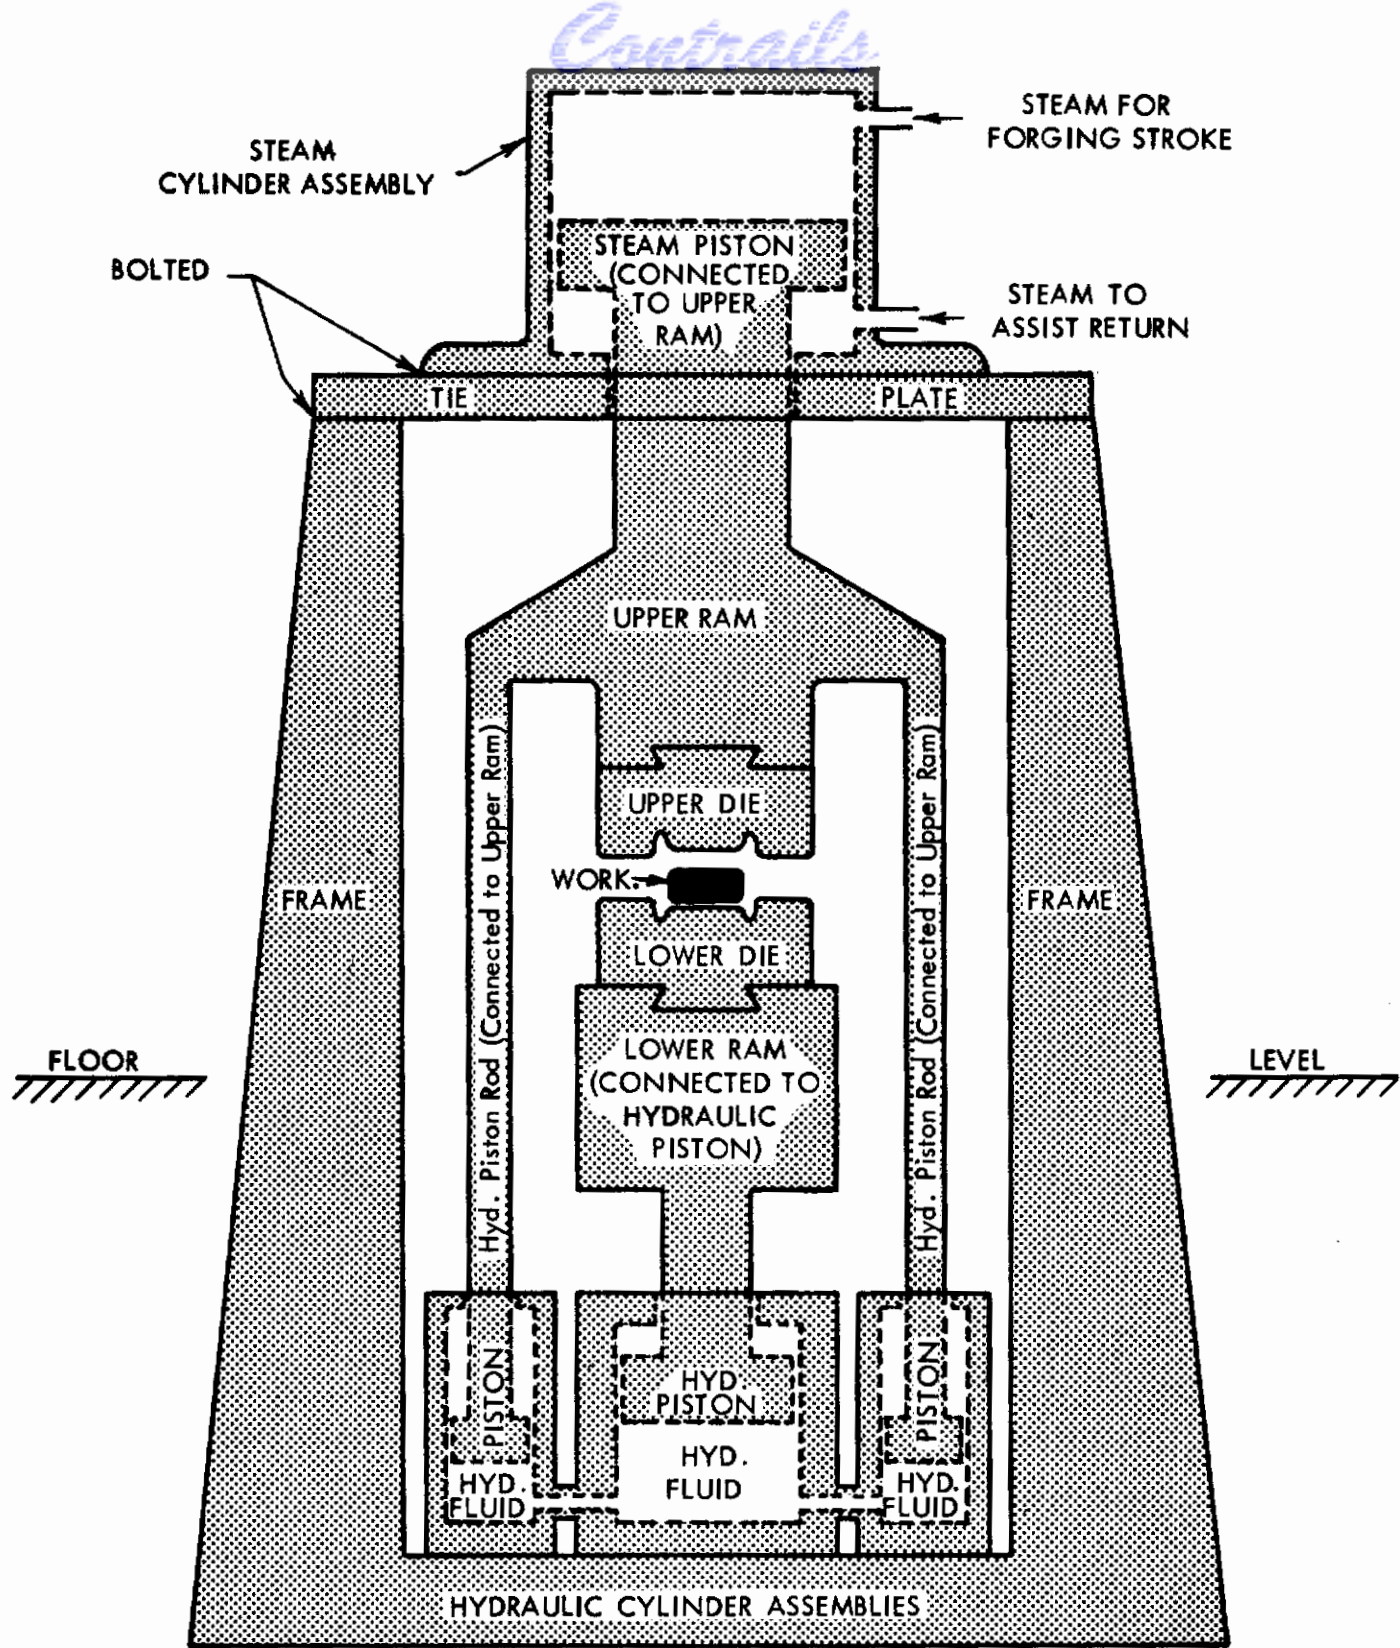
Highly Simplified Illustration of Large Counterblow Forging Hammer Construction Showing Major Components. Frame Actual Envelops Hydraulic Piston Rods and Provides "Four Corner" Guiding for Upper and Lower Rams.
